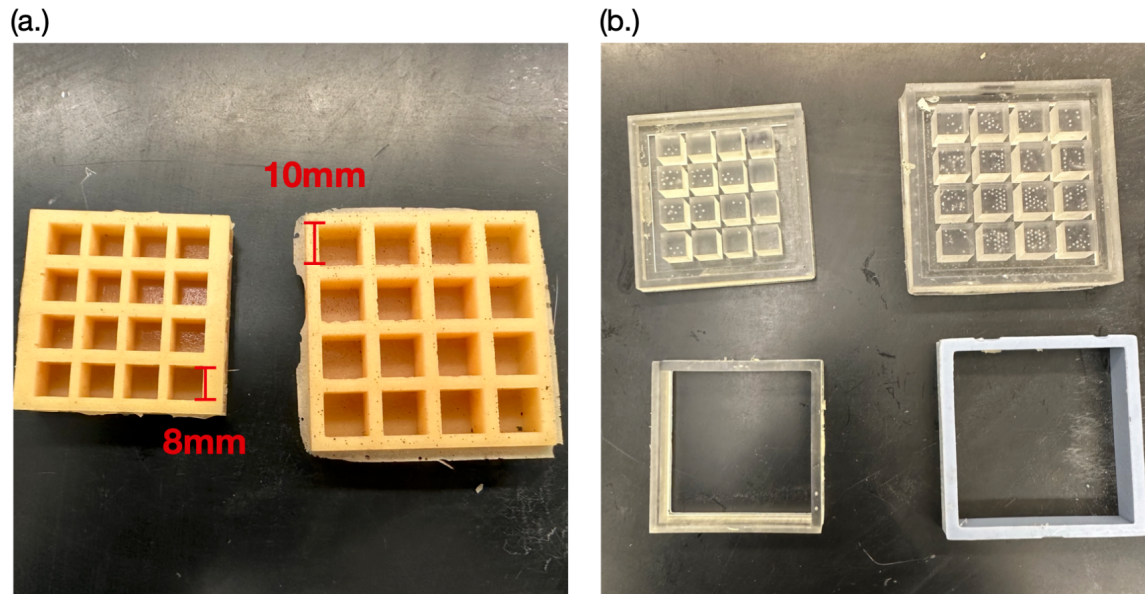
(a.) Rubber mold for cement samples. (b.) Reverse mold for casting the rubber mold.
